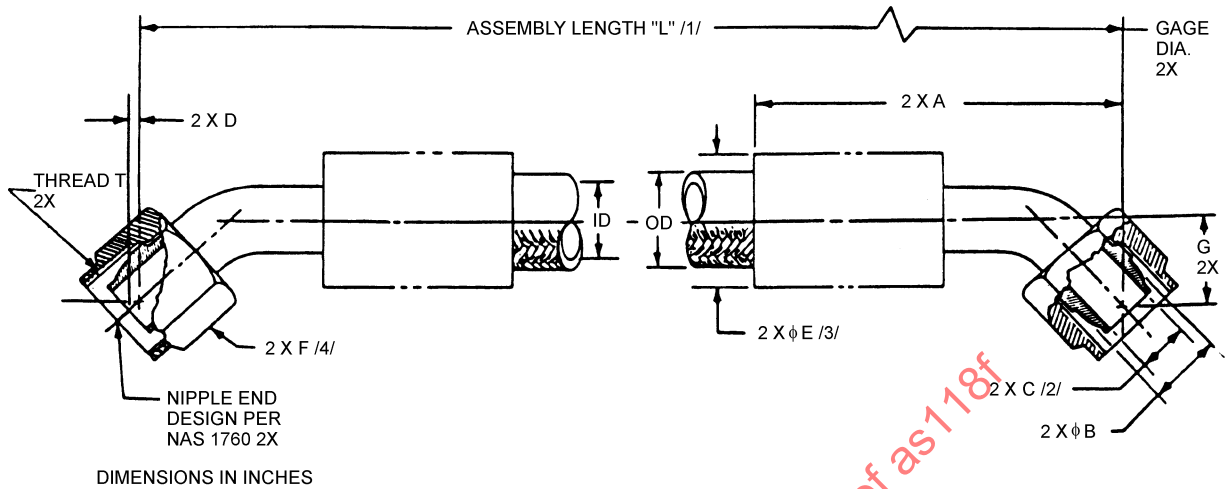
HOSE AND FITTING DIMENSIONS
